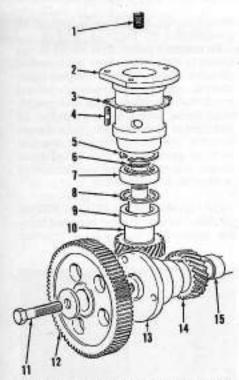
Exploded view showing three cylinder diesel fuel injection pump drive assembly and related parts.
